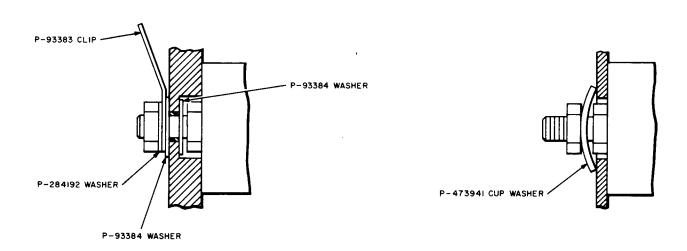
Mounting Parts for 14-Type Registers Equipped With Spacer
